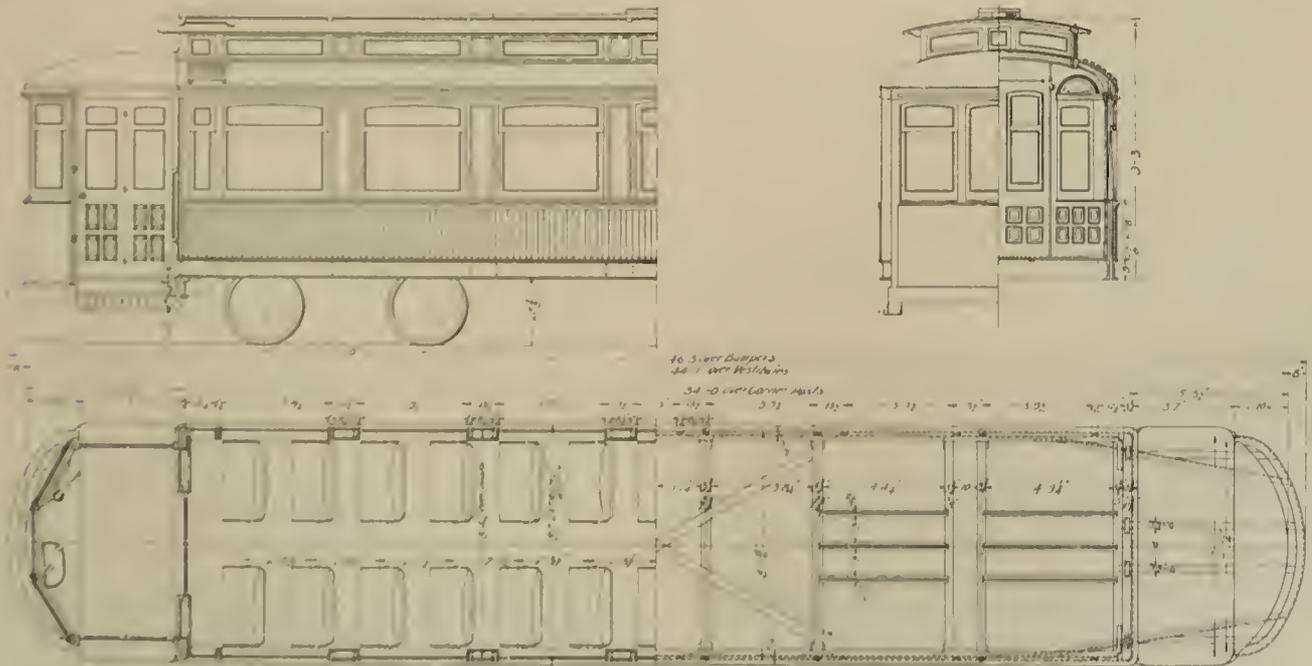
PLAN, ELEVATION AND SECTION, ROBERTSON CAR.
